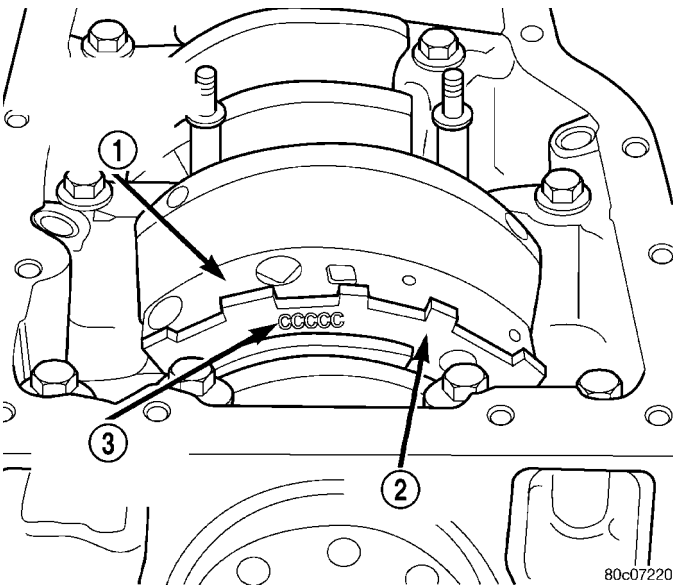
Main Bearing Markings on Target Wheel -Typical
